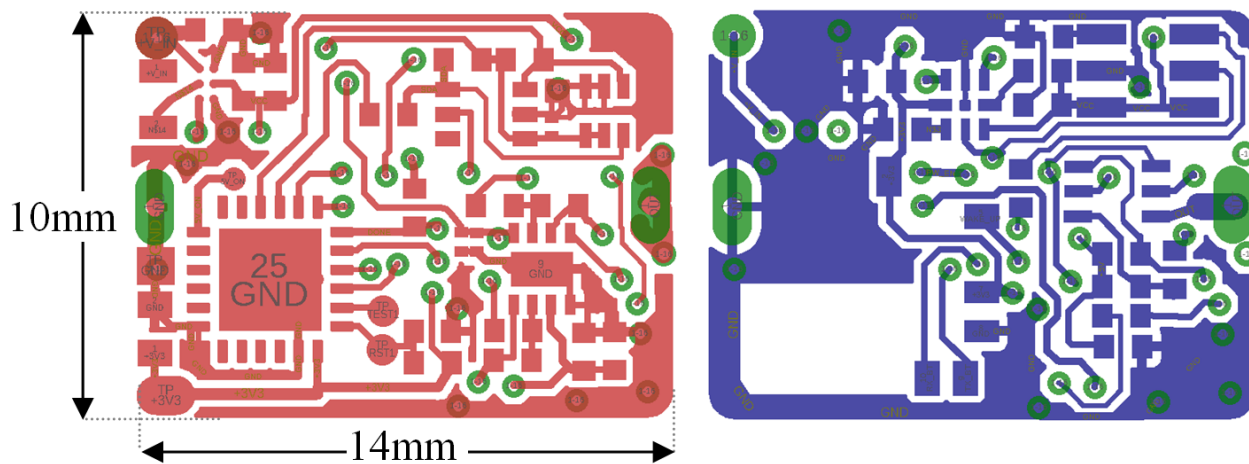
Developed PCB of the main board of prototype, top & bottom layers, scale 40:1.
